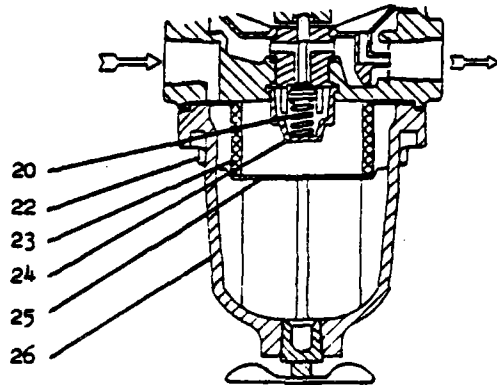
PARTIAL ASSEMBLY OF AF-2 TYPE SHOWING ADDITIONAL PARTS IN FILTER ASSEMBLY.
